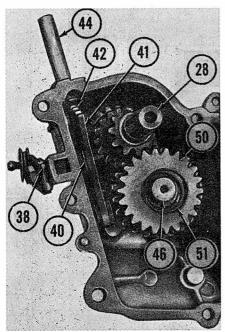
View of transmission gears and shafts installed. Refer to Fig. A2-7 for legend.
